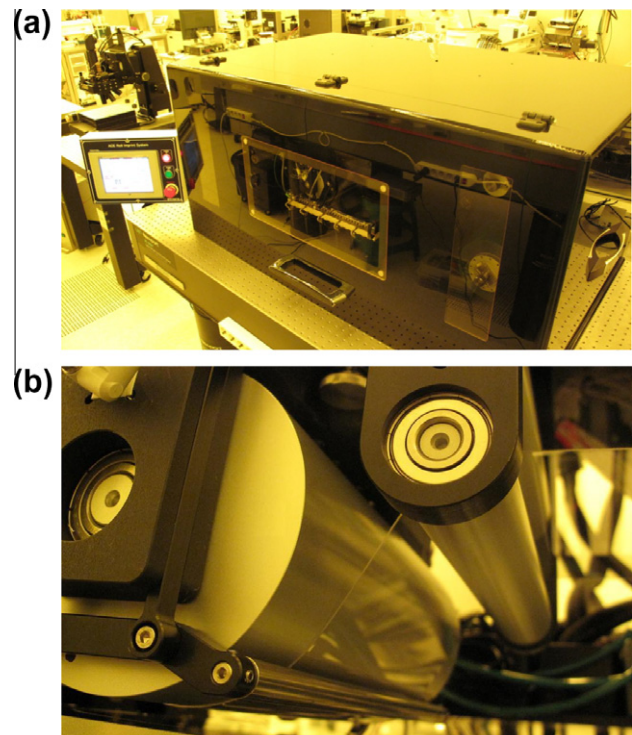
Picture of (a) the RNIL system and (b) its roller mechanism.
